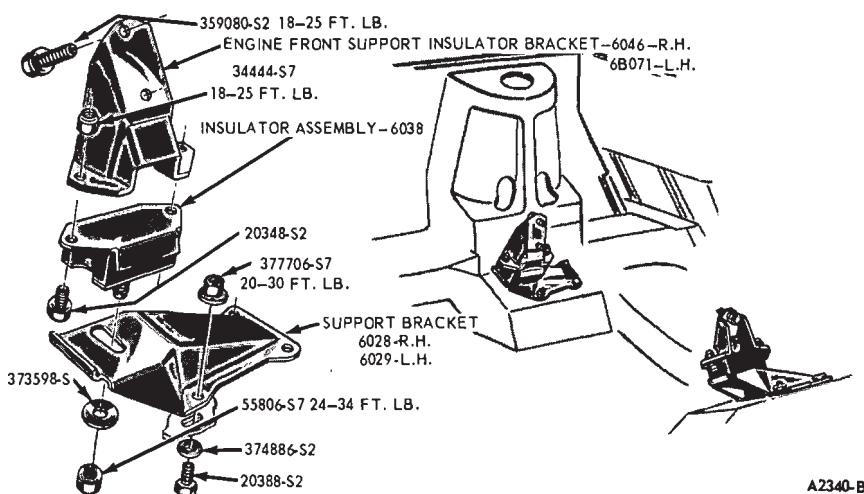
Fairlane, Falcon and Montego Engine Front Supports (Except 250 CID Engine)
